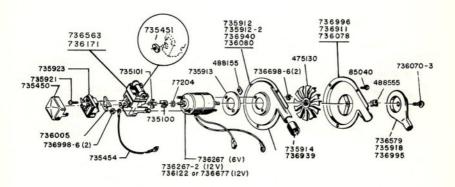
COMBUSTION AIR BLOWER ASSEMBLY
